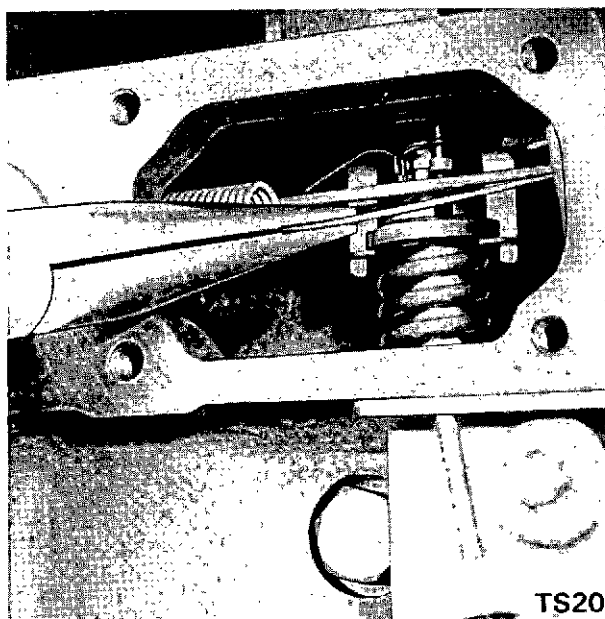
Removing Speeder Spring with Fuel Pump Door Removed.
